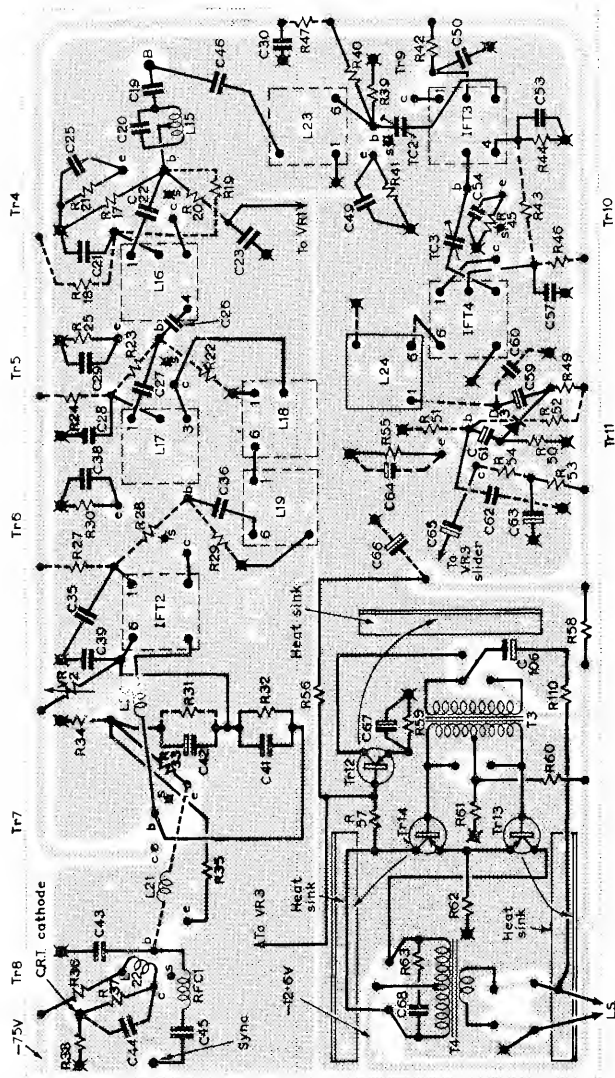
The printed board PC3 (copper parts are shown shaded). The components are mounted on this side of the board, except those shown dotted and T3 and T4 (see Fig. 12). Drilling dimensions of the i.f. transformers should be checked against individual components. The paxolin should be allowed to extend about $\frac{3}{16}$ in at either end of the above diagram to allow for mounting-brackets. All points marked "X" are soldered connections to the positive foil. R110 and C106 may be wired as in this diagram, or as in Fig. 13.
